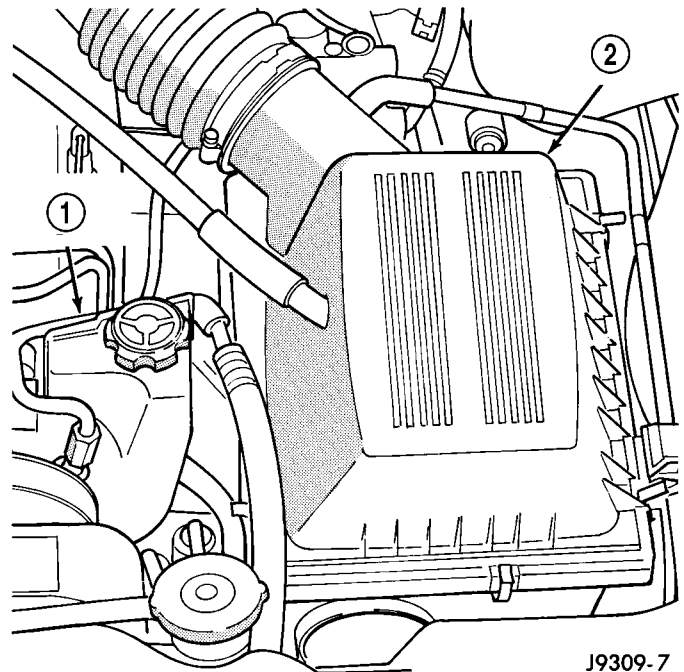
Air Cleaner Assembly & Power Steering Pump
